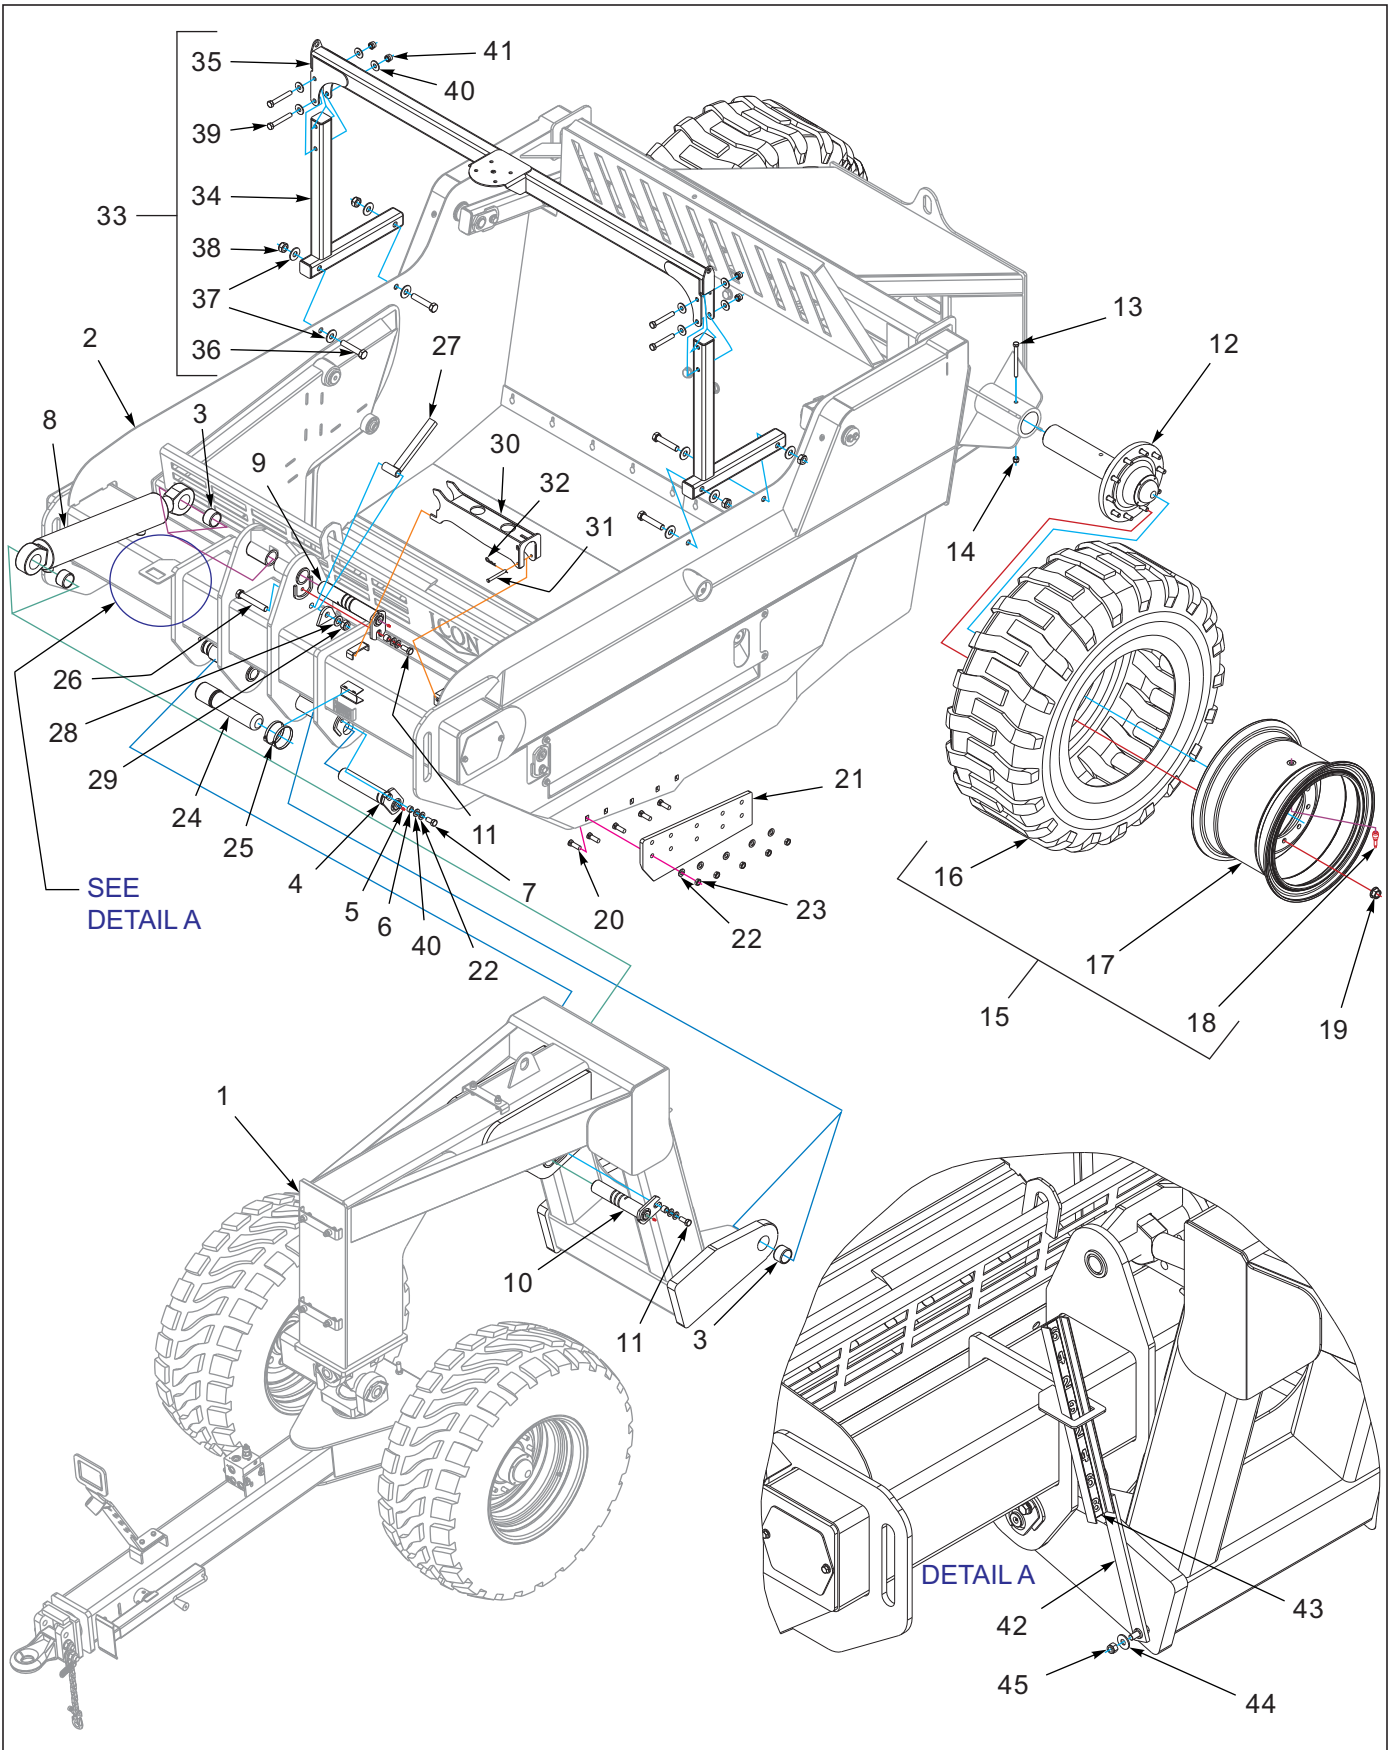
Hitch, Dolly and Component Assembly to Main Frame
